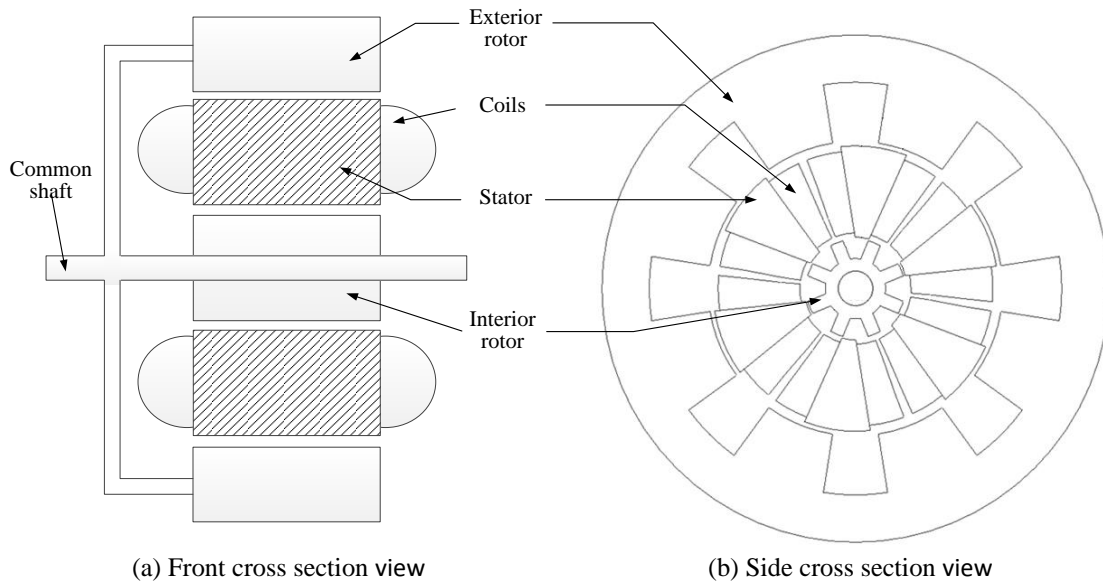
DRSRM with mechanically synchronized inner and outer rotors and central segmented stator assembly
